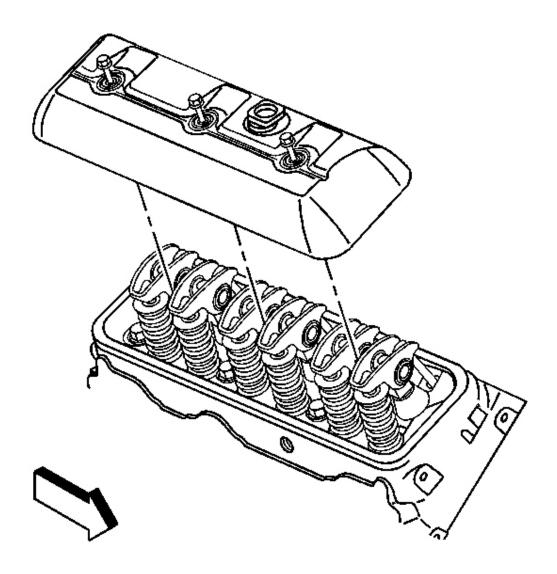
Rocker Arm Cover Courtesy of GENERAL MOTORS CORP.
